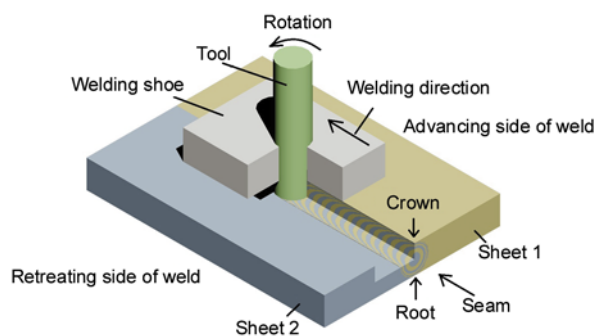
Scheme of the principle of friction stir welding for polymers
